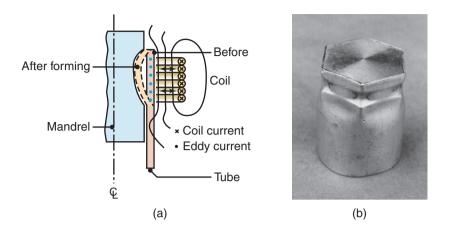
(a) Schematic illustration of the magnetic-pulse-forming process used to form a tube over a plug. (b) Aluminum tube collapsed over a hexagonal plug by the magnetic-pulse-forming process.
